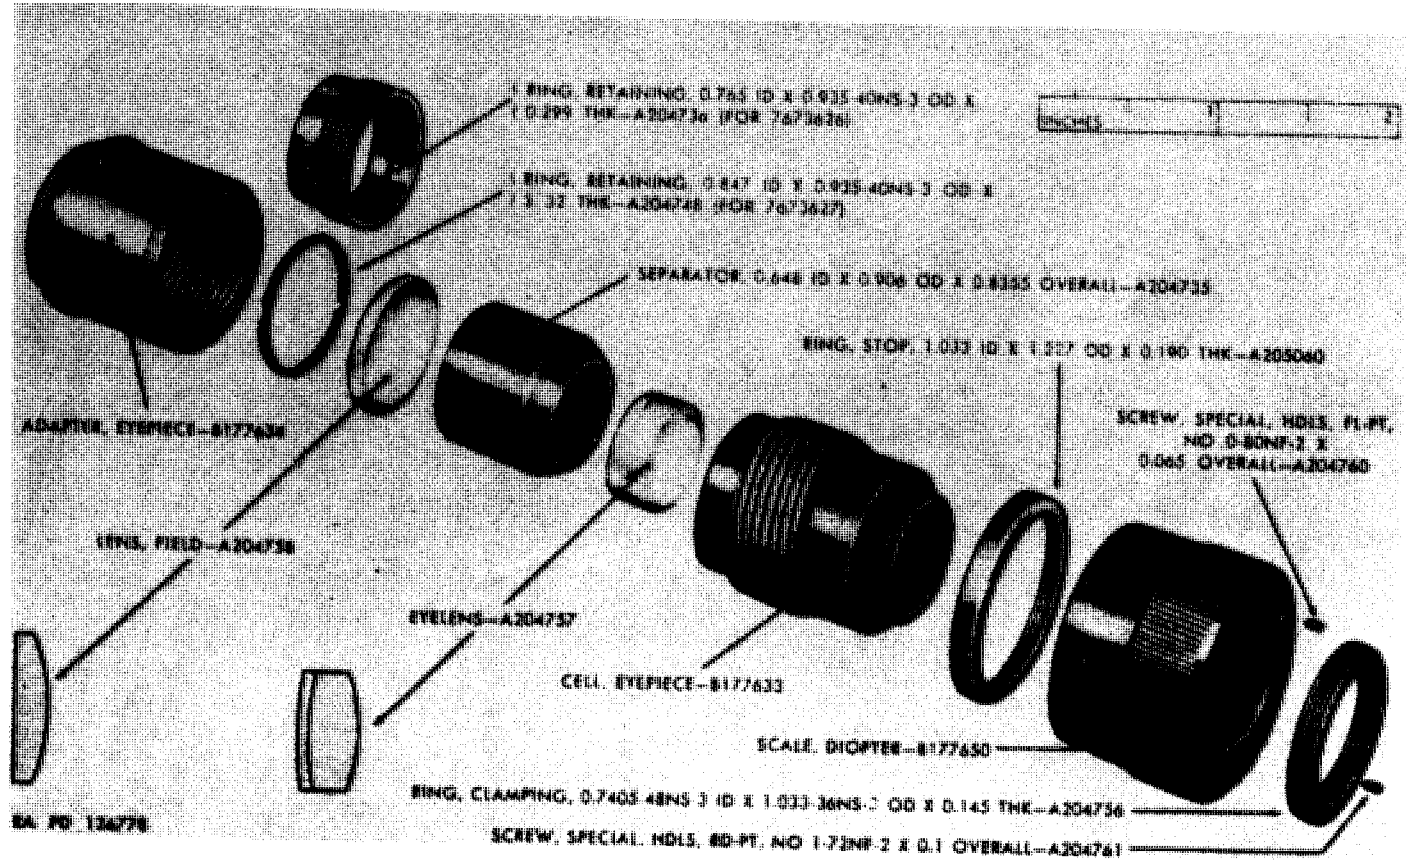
Eyepiece assembly 7673627 (left) or 7673628 (right) — exploded view.
